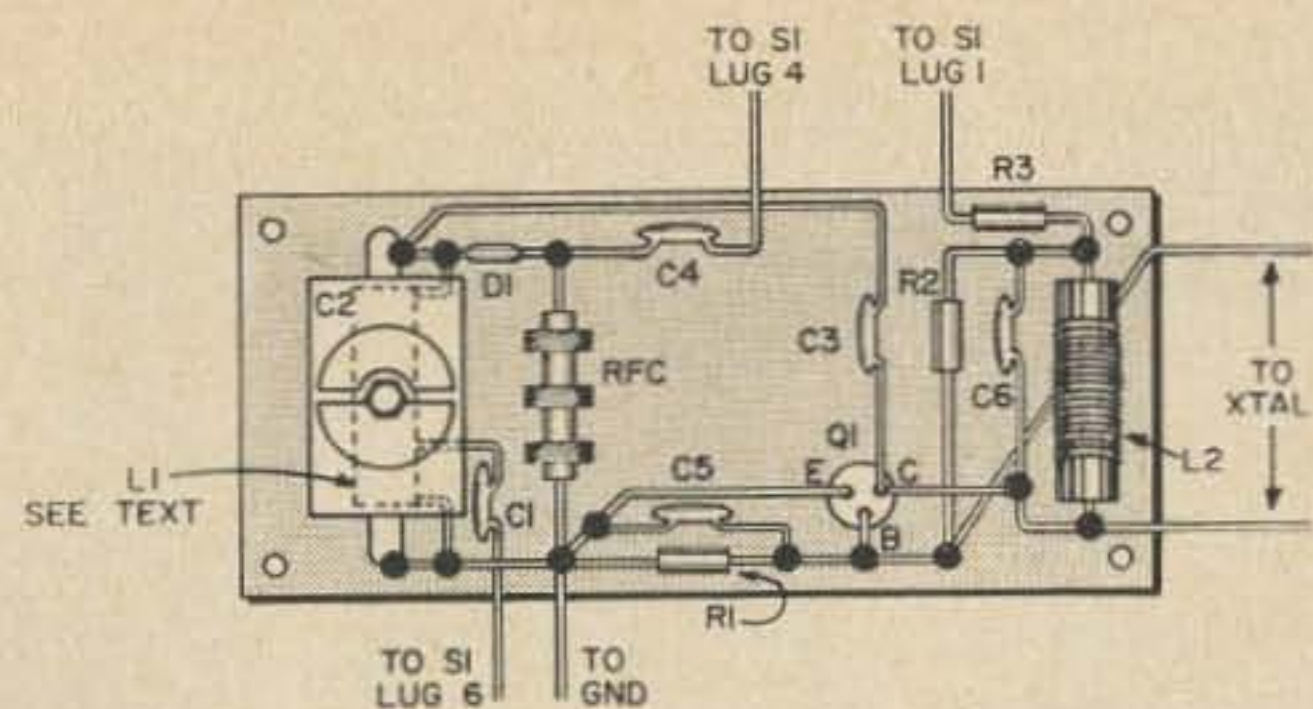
Layout of the OTC. The converter is built on a 1" x 2" piece of perforated board.
